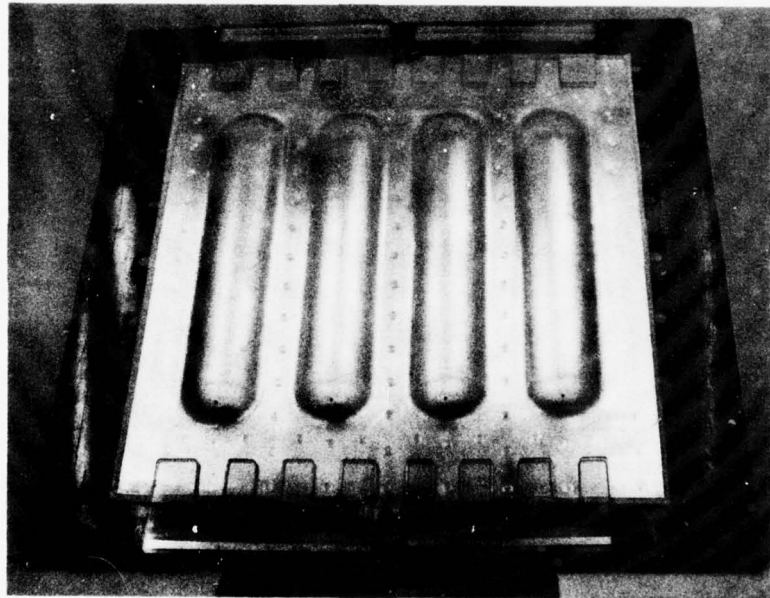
PANEL SPOT WELD LOCATING TOOL
